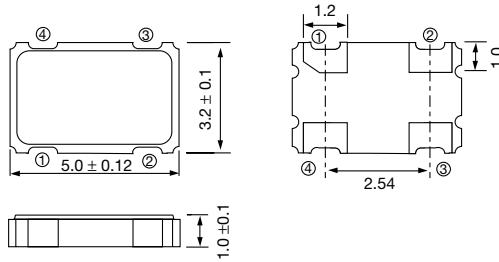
ECS-3961/3963 Series Top, Side and Bottom Views
